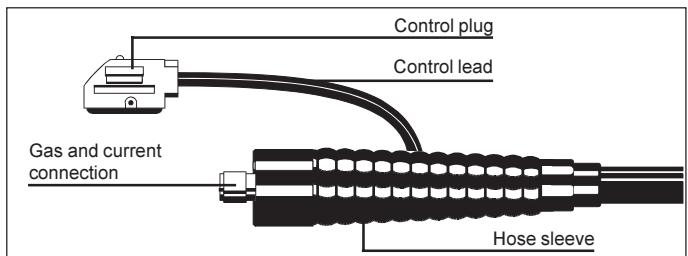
Design with Fronius central welding torch connection F: Torch connection gas-cooled
